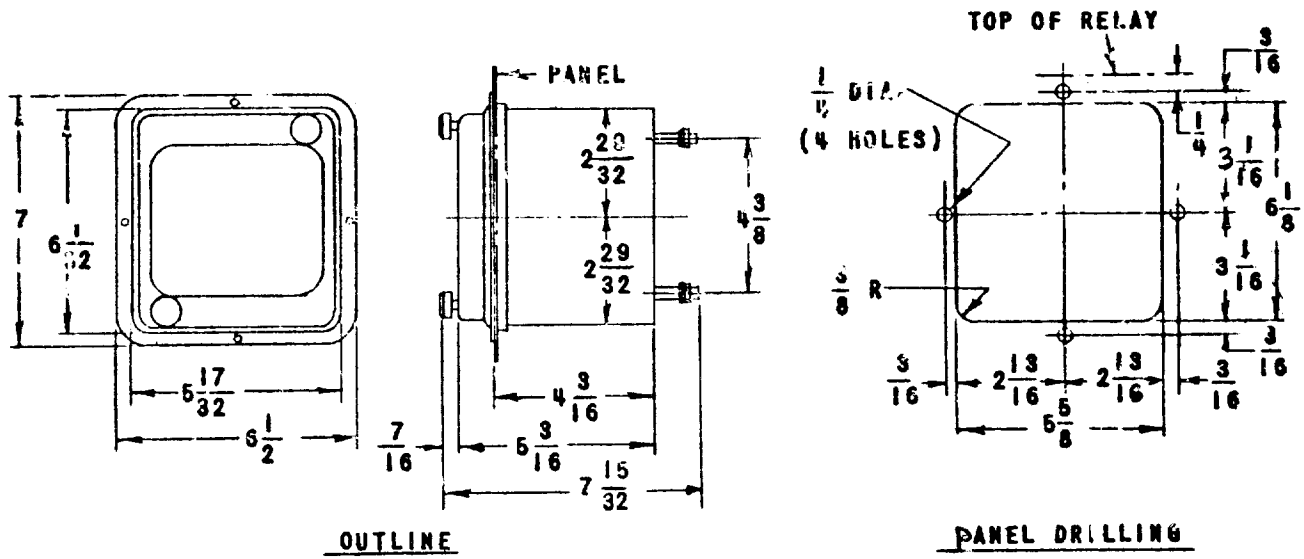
(8043606) Front Connected Surface Mounted HFA Relay (Front View)
